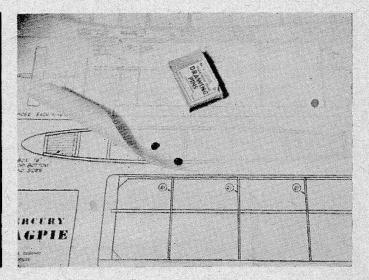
Cover plans with translucent waxed paper to prevent frames adhering to them.
